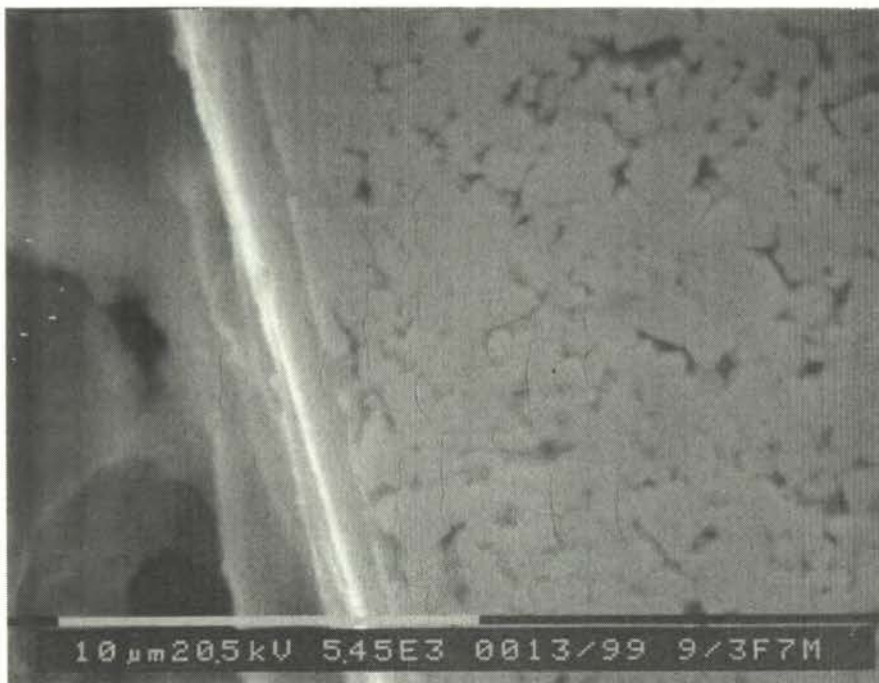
28 Magnified view of a sectioned KC720 tool showing smoothly worn carbide grains on the flank face, suggesting the presence of abrasion/diffusion wear mechanism; after machining Inconel 718 for 7 minutes at 50 m/min and 0.08 mm/tooth.
